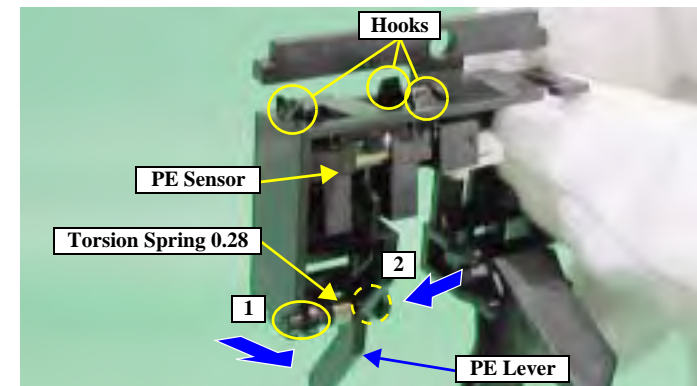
PE Sensor/PE Sensor Holder/PE Lever Removal 2
